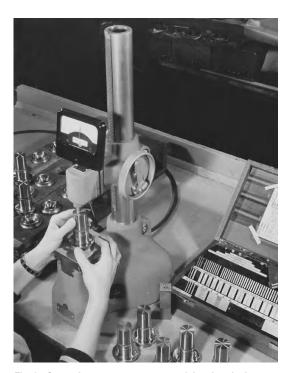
General-purpose comparator of the electrical type being set with gage blocks (in box to right). (*Pratt and Whitney Co.*)
